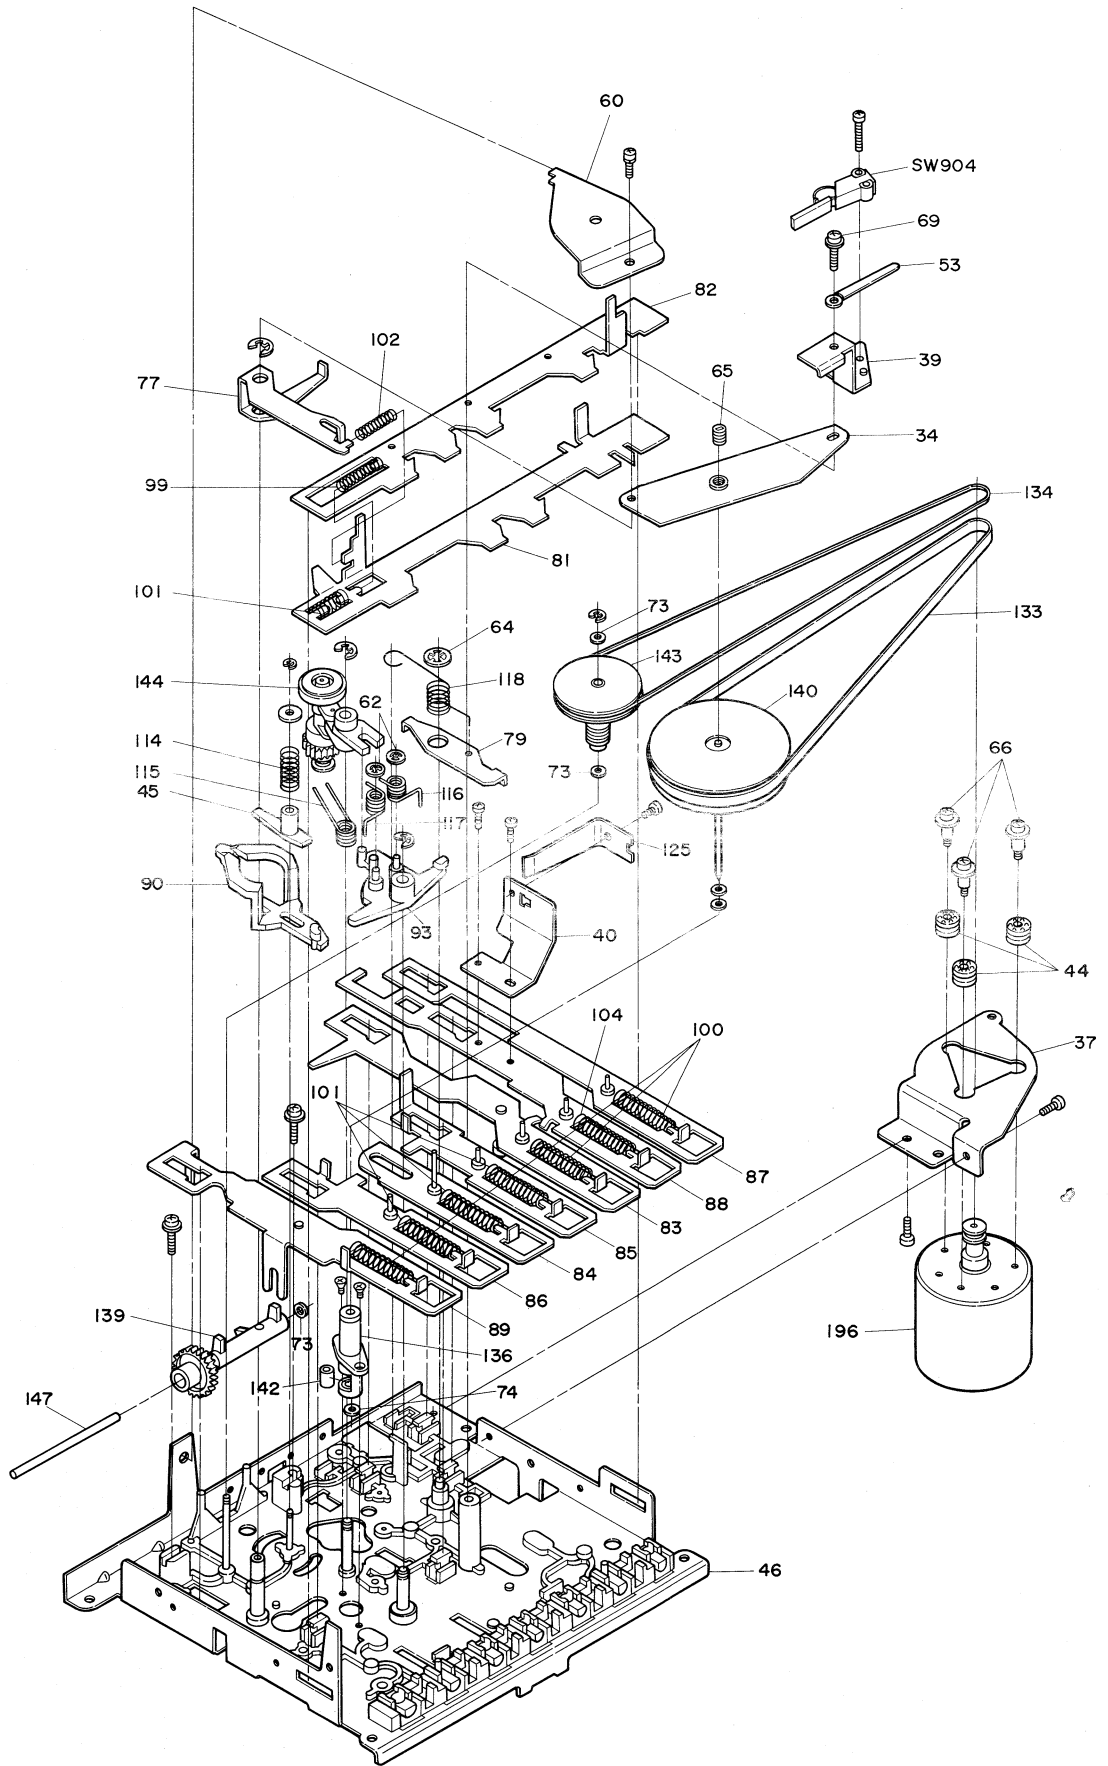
MECHANISM EXPLODED BOTTOM VIEW
